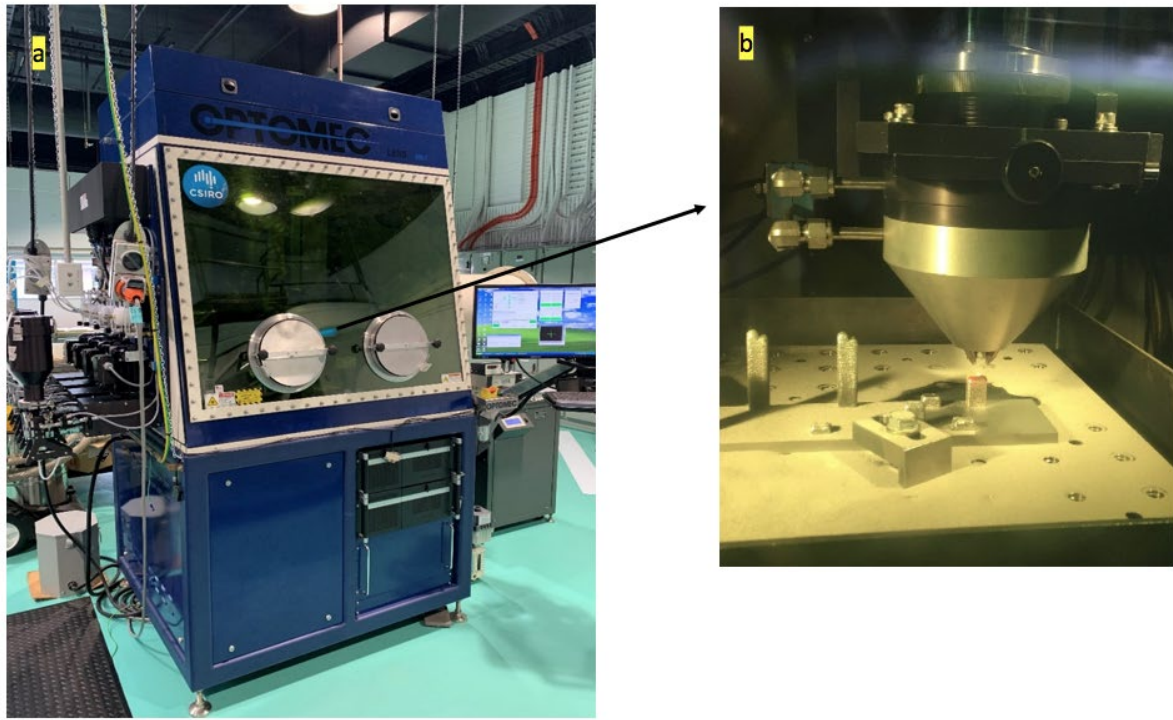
Optomec MR-7 machine used for TiAl printing (a) Optomec machine used in this study (b) LENS printing process.
